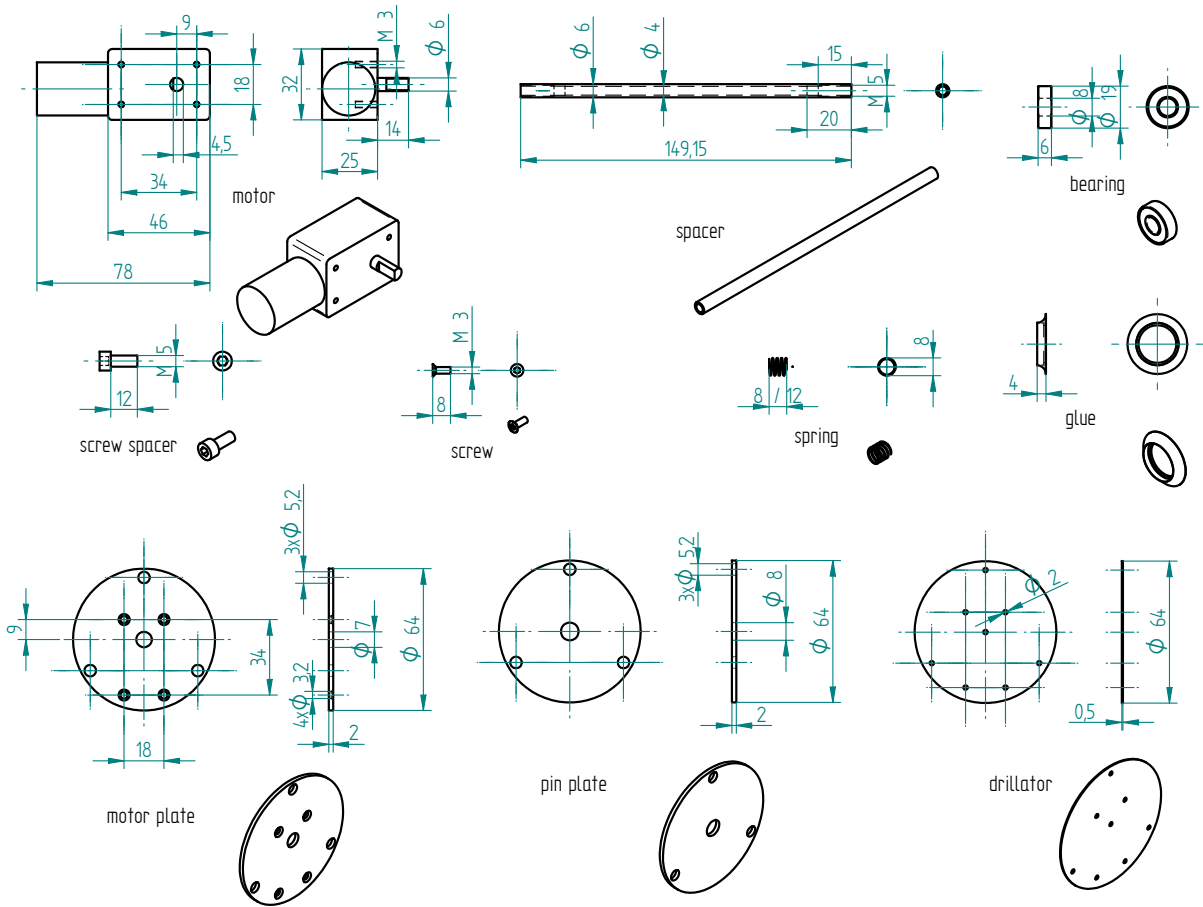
Drawing of the vacuum lock adapter moldator parts
